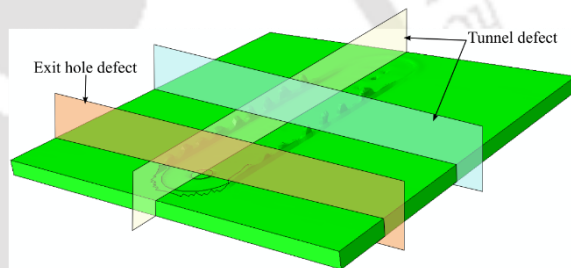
Schematic of tunnel and exit hole defect directions in the welded workpiece
